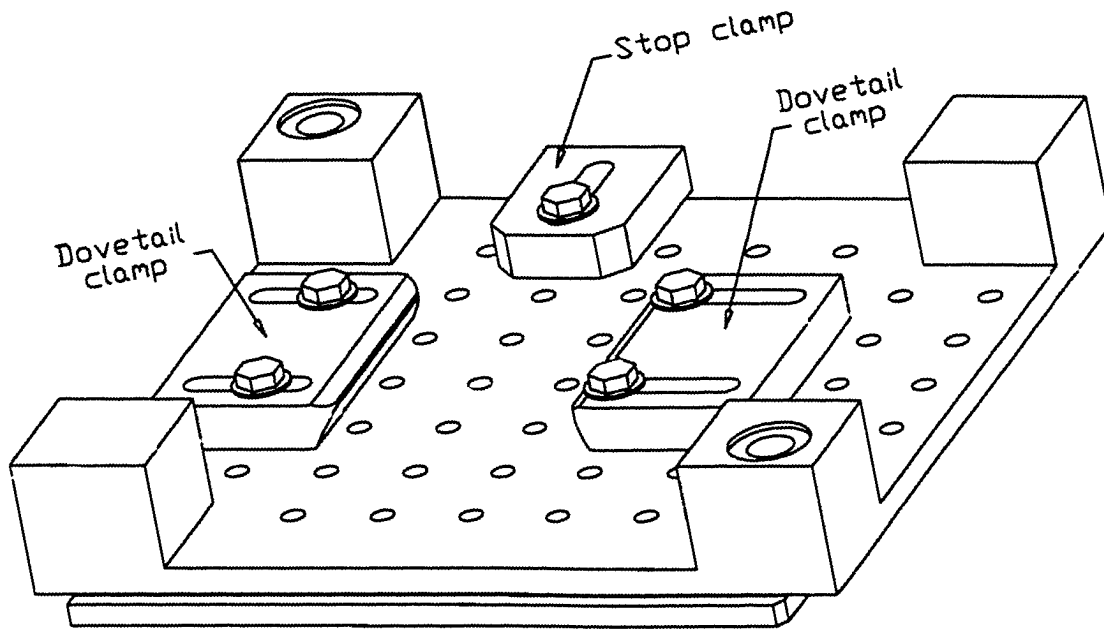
Close up view of the dovetail-type flexible fixturing system.
